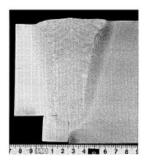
Macroetch test specimen of welded metal by submerged arc welding with multiple electrodes
